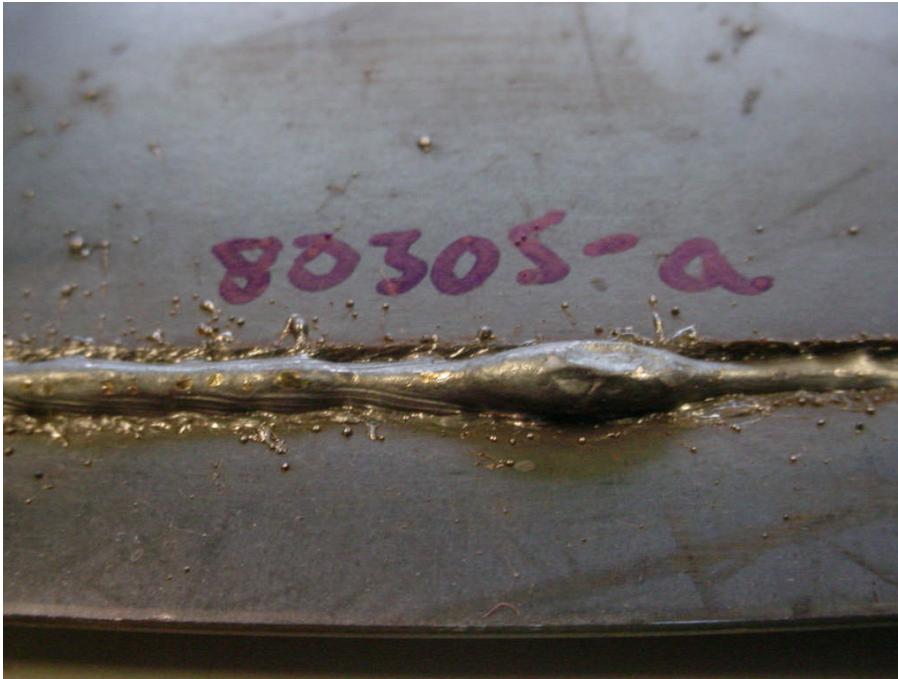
Side View of GMAW-P Fillet Weld Humping in a Lap Joint for Specimen 80305a WFS 15.2 m/min, TS 3.0 m/min, 225 A, 34 V, 16-mm CTWD, 1.6-mm Sheet
